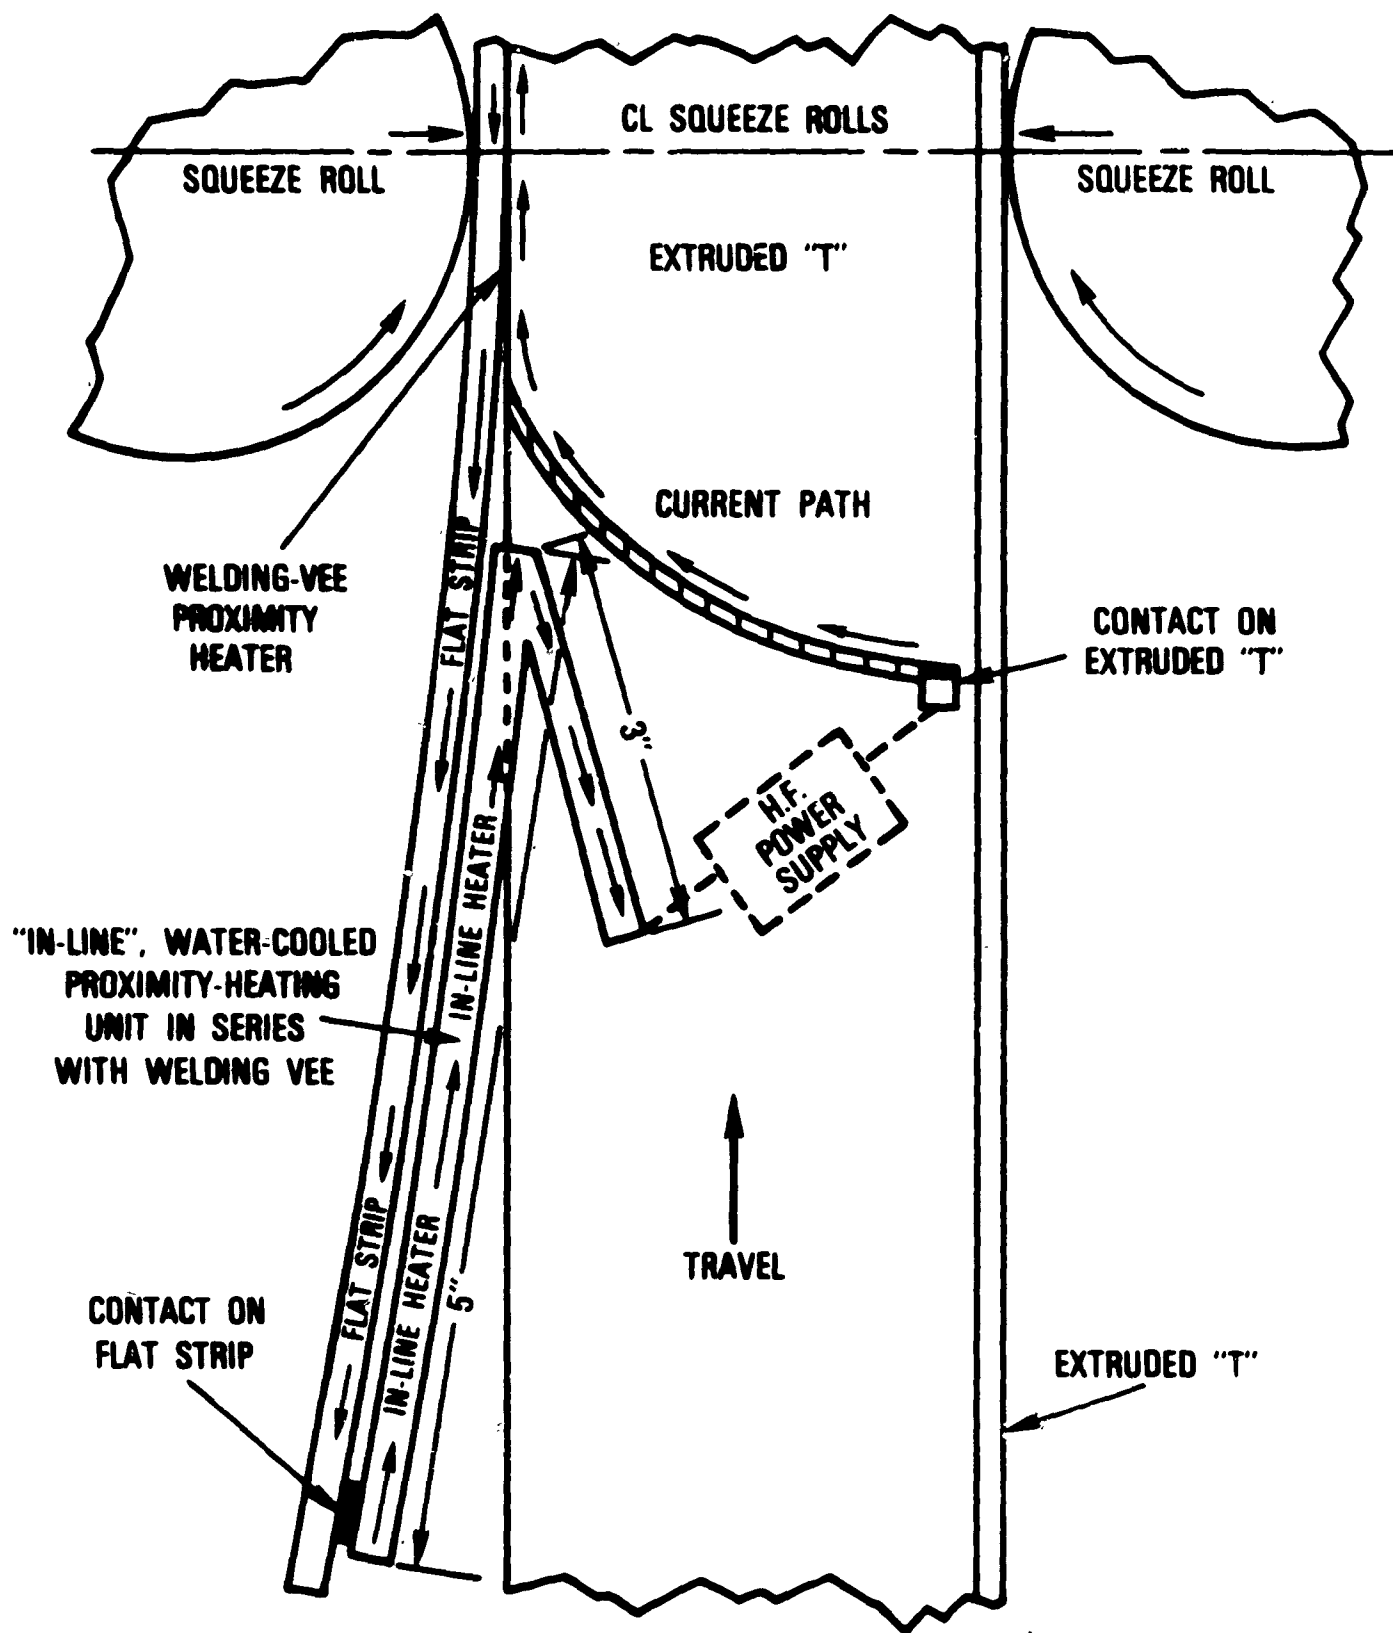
PATH OF CURRENT DURING ONE CYCLE, FROM CONTACT ON "T" TO WELDING VEE, TO CONTACT ON SHEET AND BACK TO POWER SOURCE THROUGH WATER-COLD SIDE OF THE "IN-LINE" PROXIMITY HEATER.
